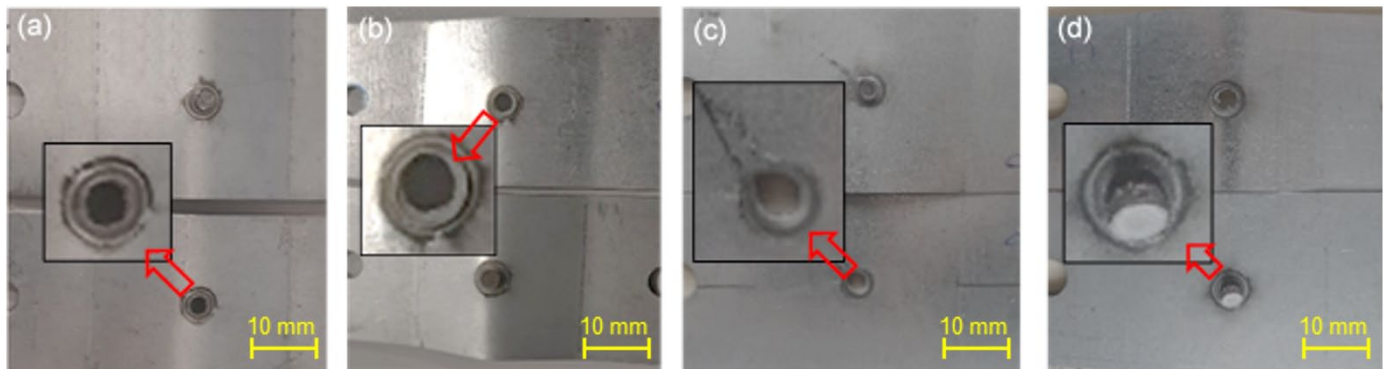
The fracture modes of the S1 (a), S3 (b), S4 (c) and S5 (d) welded joints after the cross-tension test
